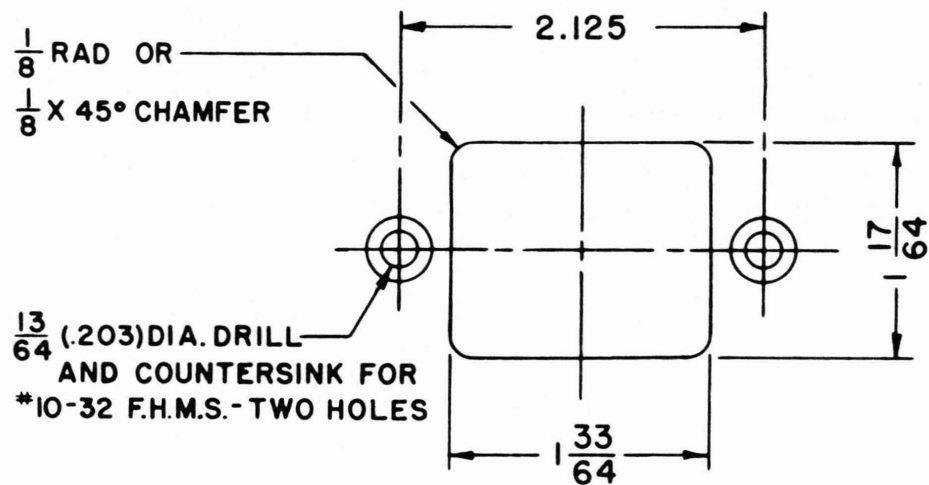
PANEL CUT FOR MOUNTING RF BODY
